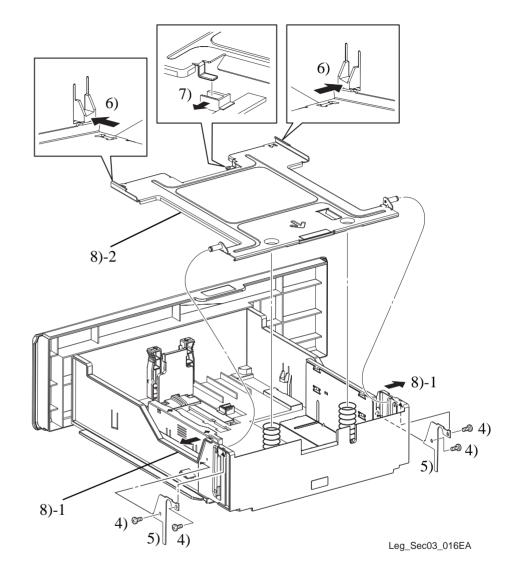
Removal of PLATE ASSY BOTTOM 500 (2)
